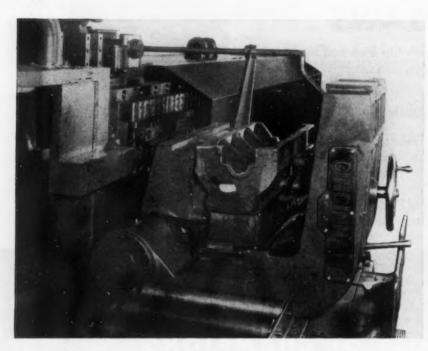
Crankcase face finishing on a Cincinnati hydraulic broach.
